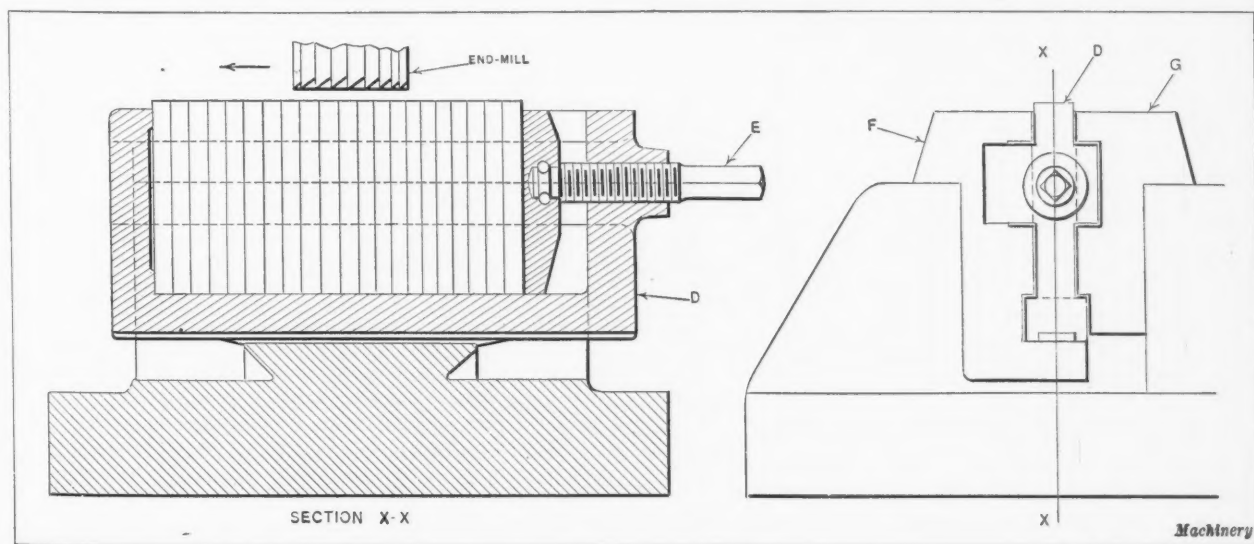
Work-holding Cage and Auxiliary Vise Jaws used in milling Pieces to Uniform Length
